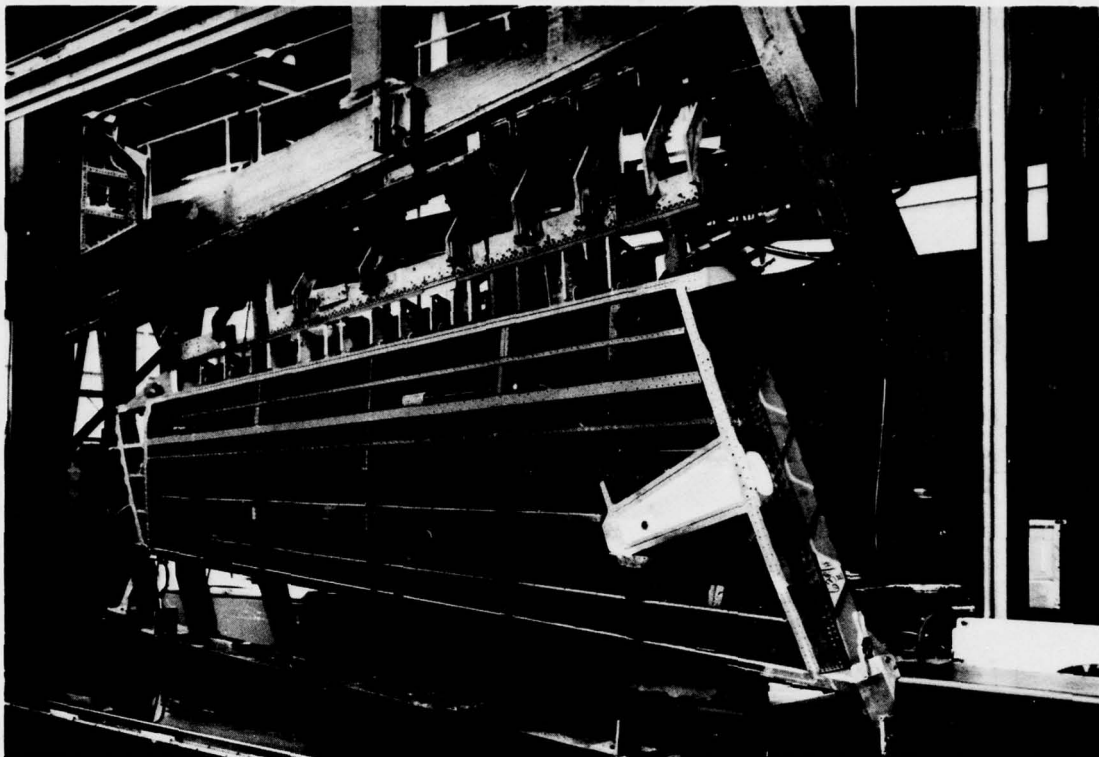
Aircraft Wing Substructure in Assembly Fixture
